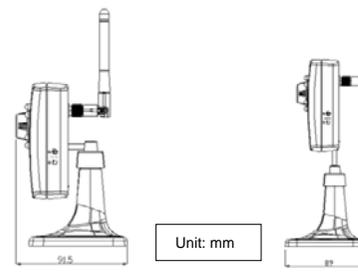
ACCESSORY ASSEMBLY SIDE VIEW
